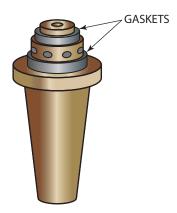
Some cutting tips use gaskets to make a tight seal.
